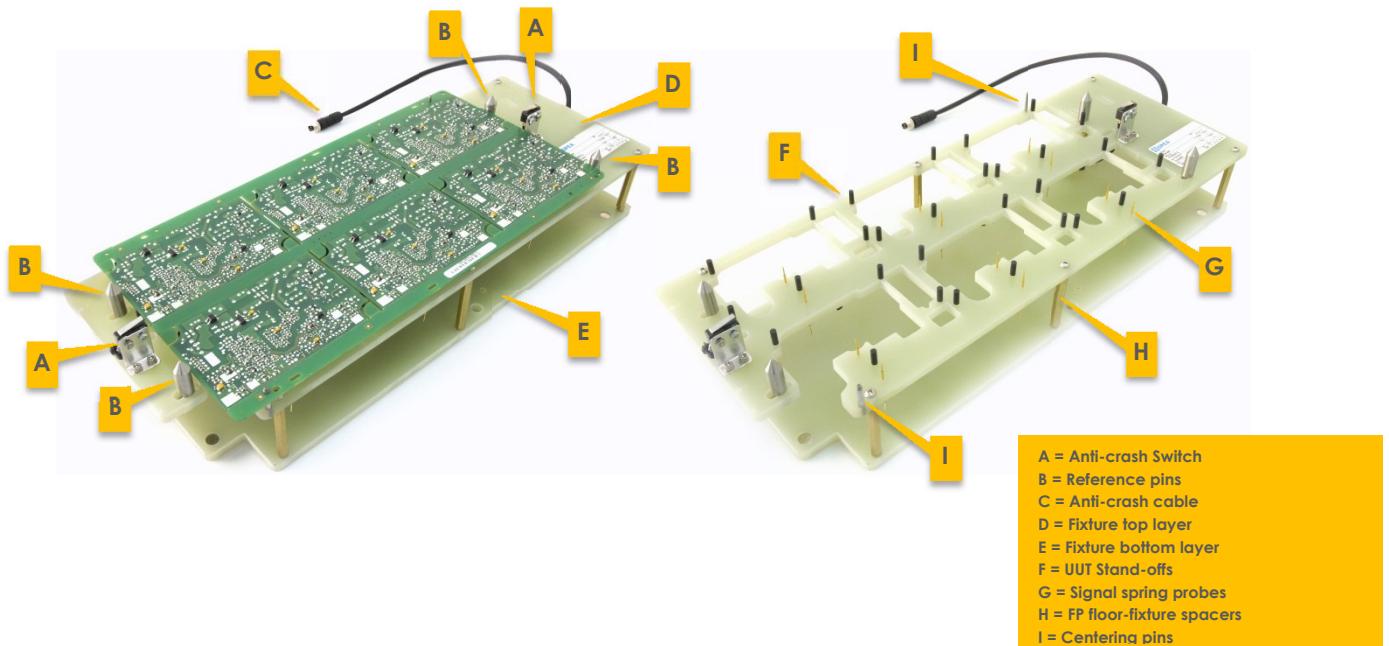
a – Example of a 6-board panel fixture for an In-Line system
